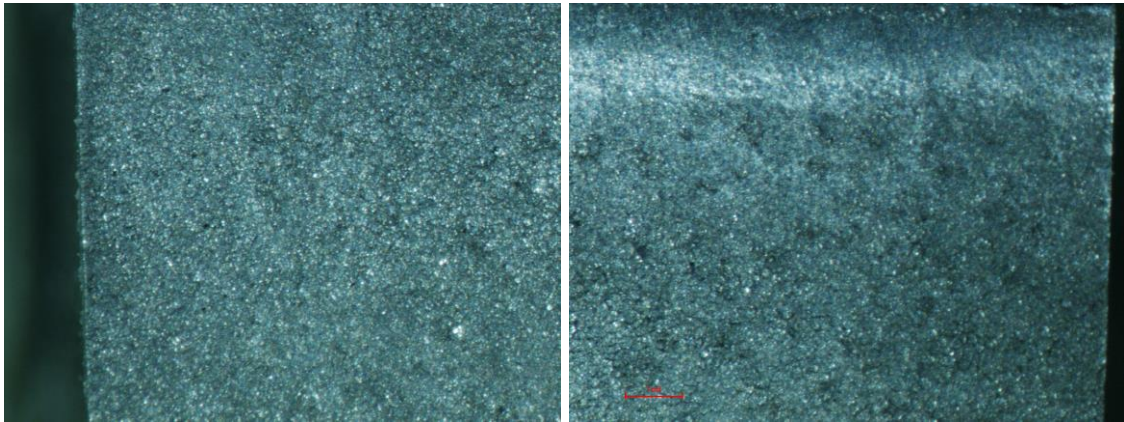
D2 Sample 2 Impact Test 50x W Side (Left) D2 Side (Right)
